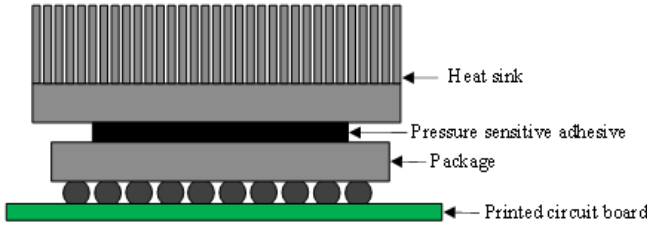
Schematic cross section of component-heat sink assembly with PSA joint.
